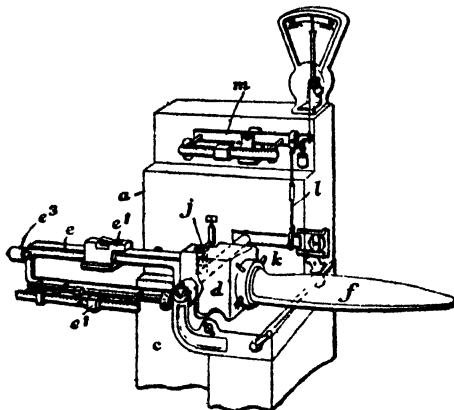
MACHINE FOR STATIC BALANCING OF SMALL PROPELLERS AND SPINNERS
